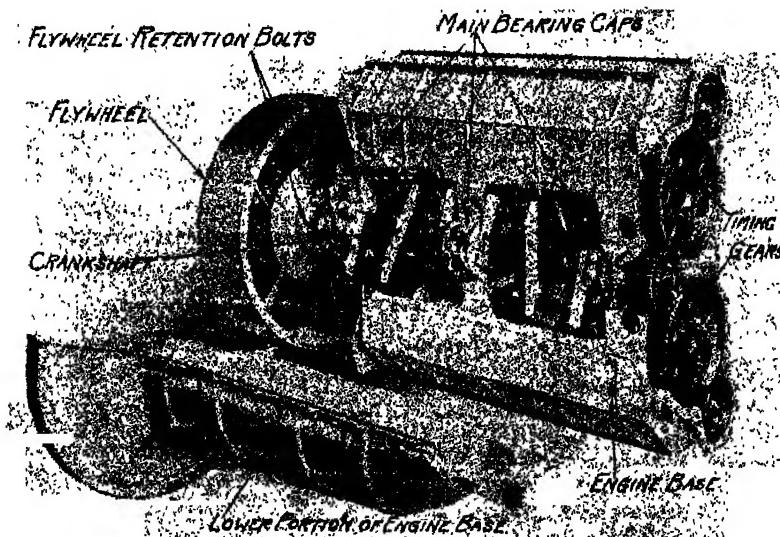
Lower Portion of Engine Base Removed to Show Crankshaft and Accessibility of Main Bearings.
